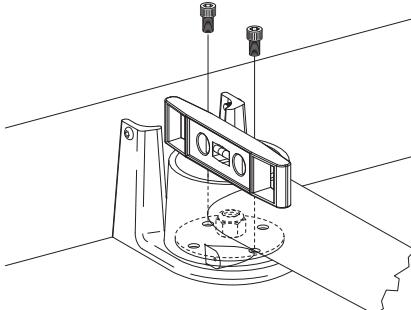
Adjustment - Arm Assembly Leveling Side to Side
